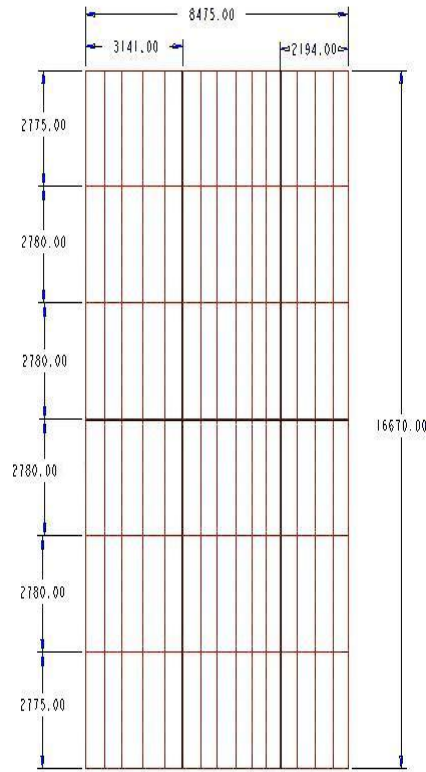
Plan of Hatch Cover of Capsize bulk carrier
